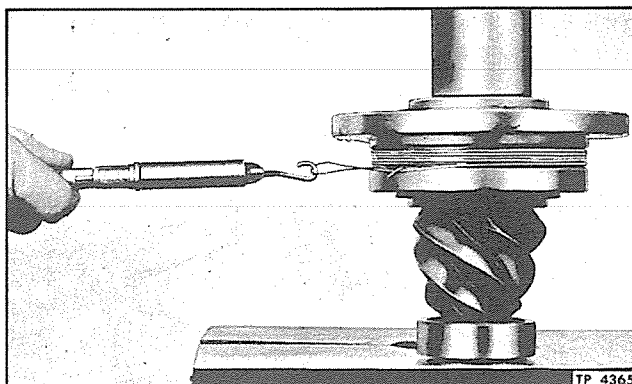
Checking Drive Pinion Bearing Pre-Load Adjustment (Tool No. J-544A)
